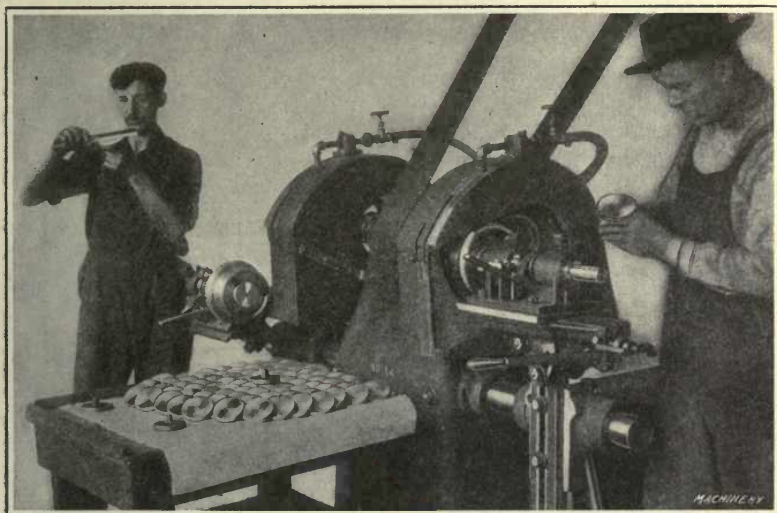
Surfacing High-explosive Shell Gas Plugs on a Besly No. 14-16-Inch L "Wet" Ring-wheel Grinder
